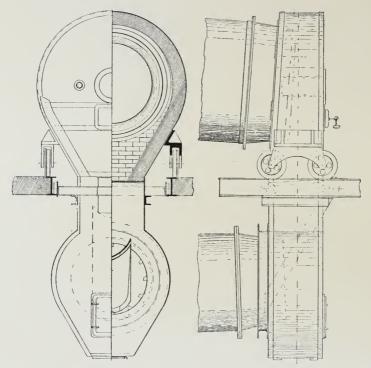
Kiln and Cooler Heads arranged on Carriages.
